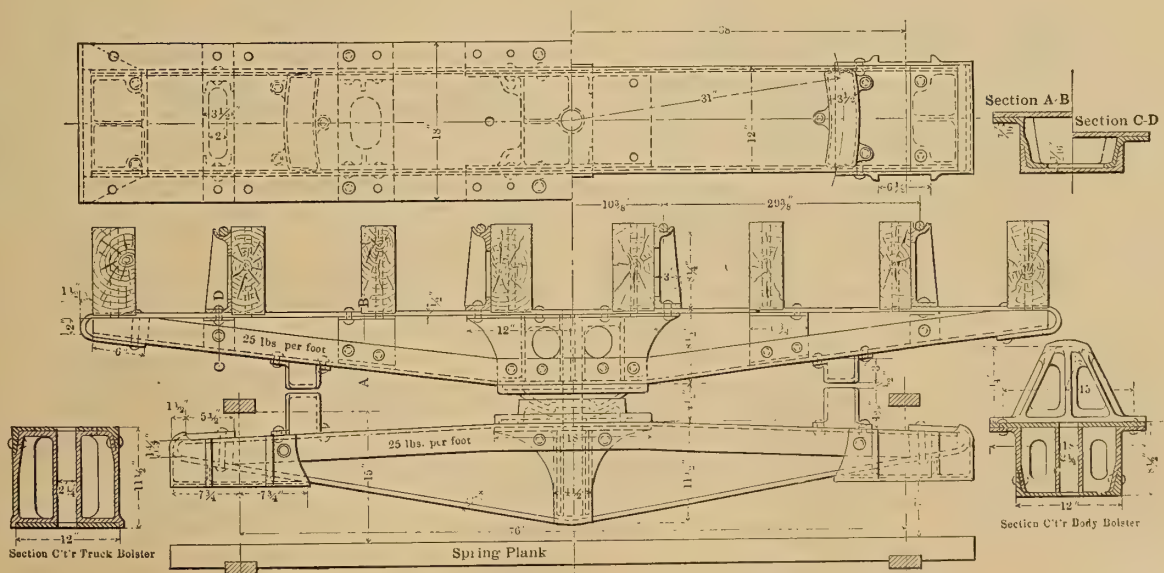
SIMPLEX BODY AND TRUCK BOLSTERS WITH SUSEMILH ROLLER SIDE BEARINGS.
